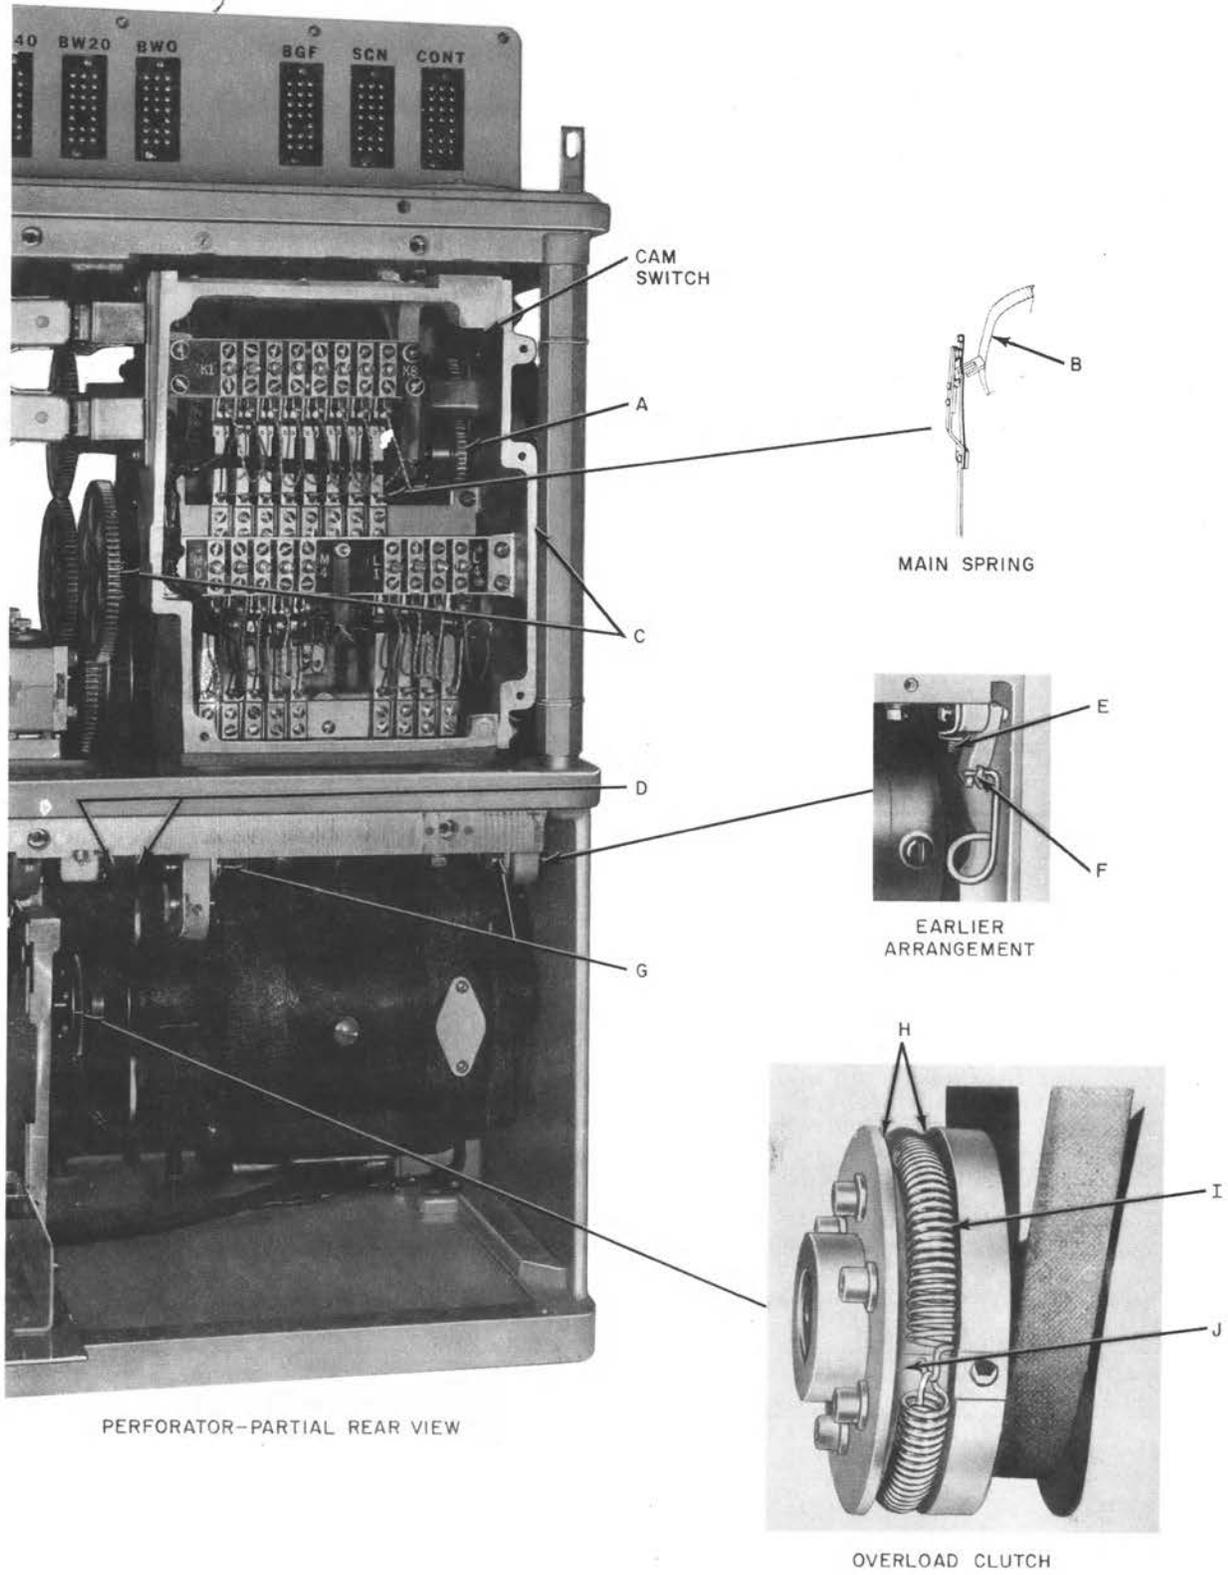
Lubrication Points—Cam Switch, Motor Mounting, and Overload Clutch
